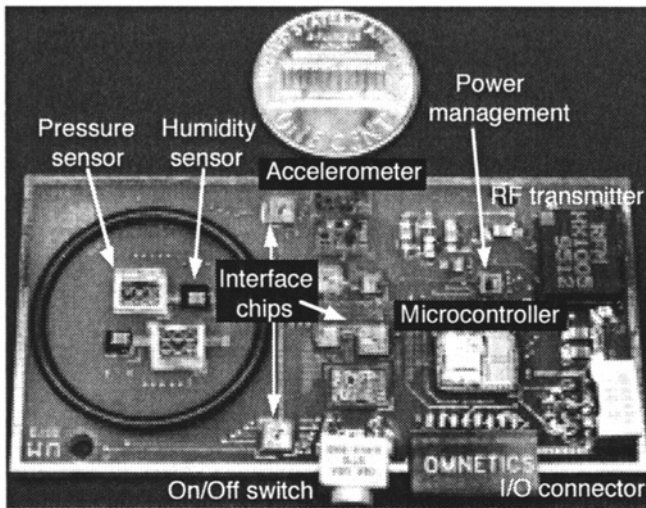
A populated μ Cluster PCB showing the layout of the components on the system.
